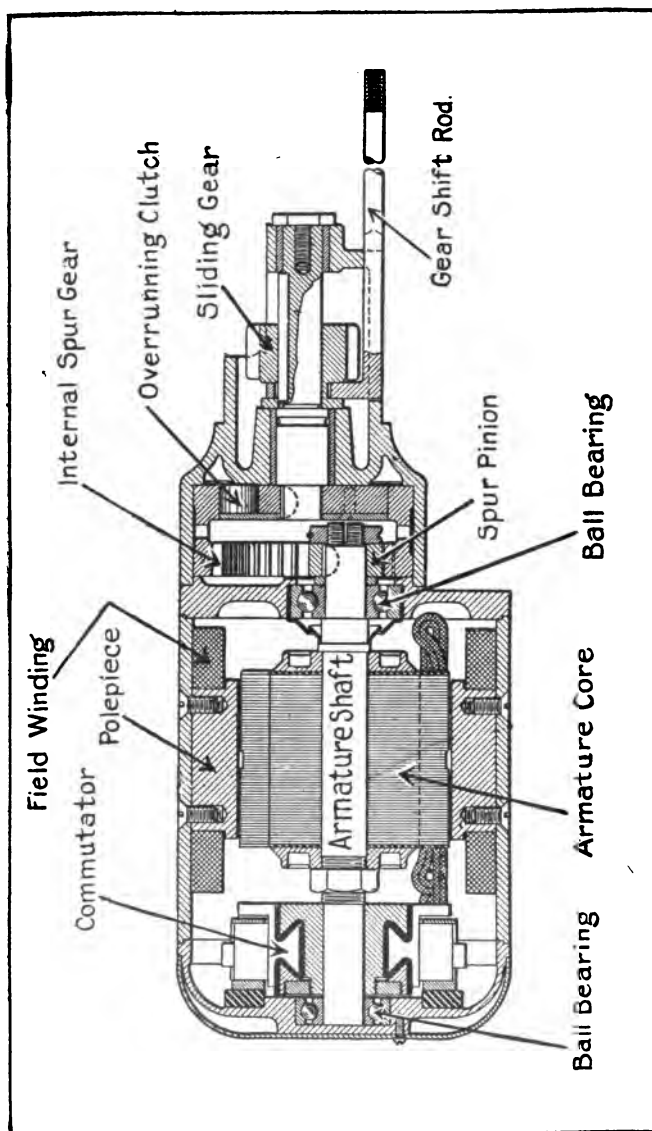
Sectional View of Typical 1914 Starting Motor Showing Reduction Gearing, Overrunning Clutch and Sliding Gear to Engage Teeth on Engine Flywheel.
